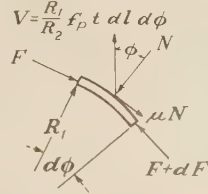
TRANSVERSE VIEW OF ELEMENT IN STRETCHED PART OF SHEET
